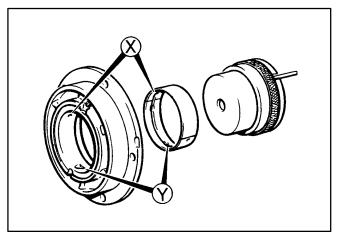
MAIN BEARING HOUSING OIL HOLE
